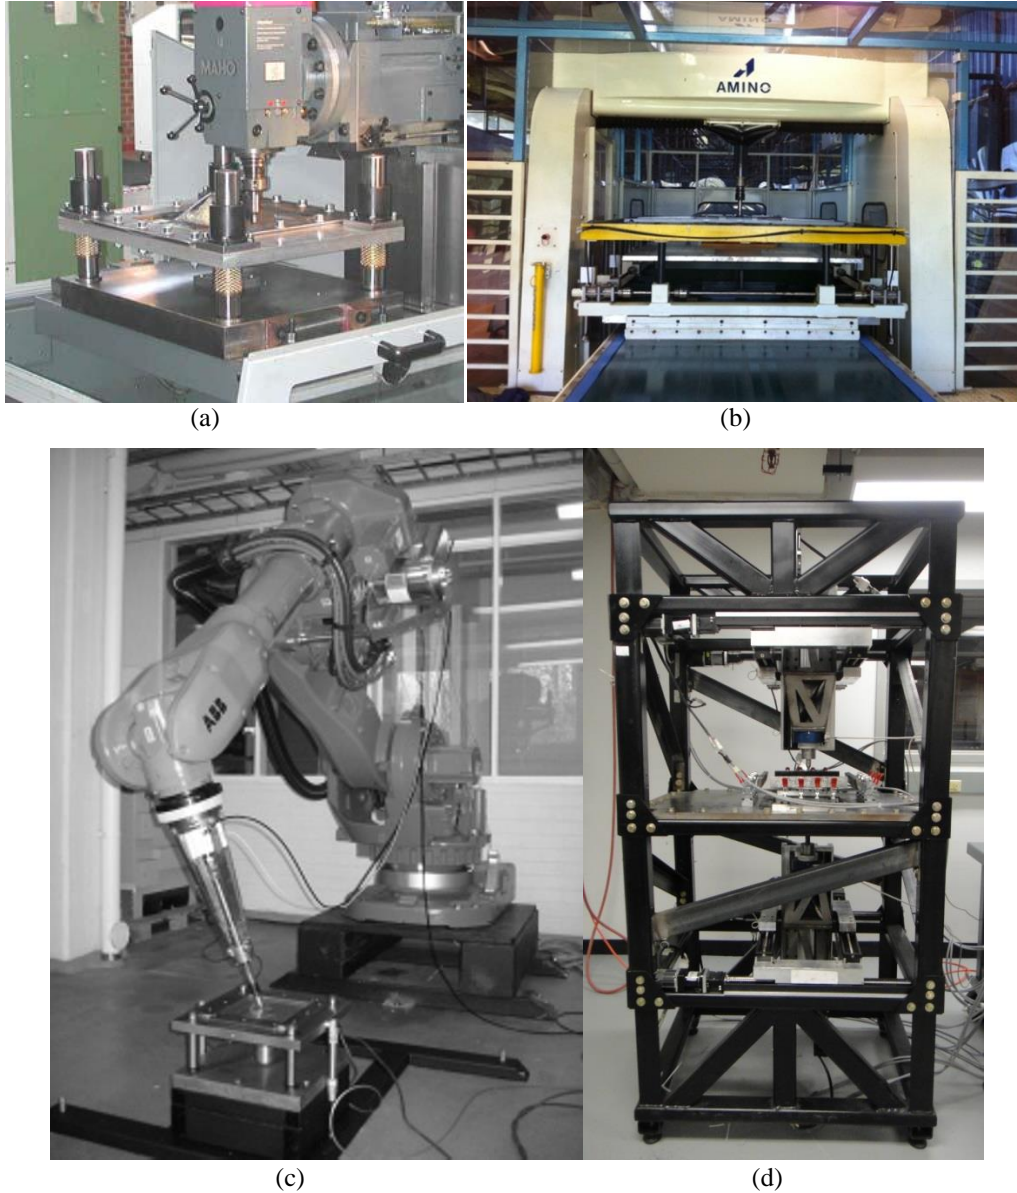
Forming machinery for ISF: (a) Upgraded conventional milling machine for ISF [1]; (b) Dedicated AMINO ISF machine [21]; (c) Robot assisted incremental forming [22]; (d) A prototype double sided incremental forming machine fabricated at Northwestern University [23]
